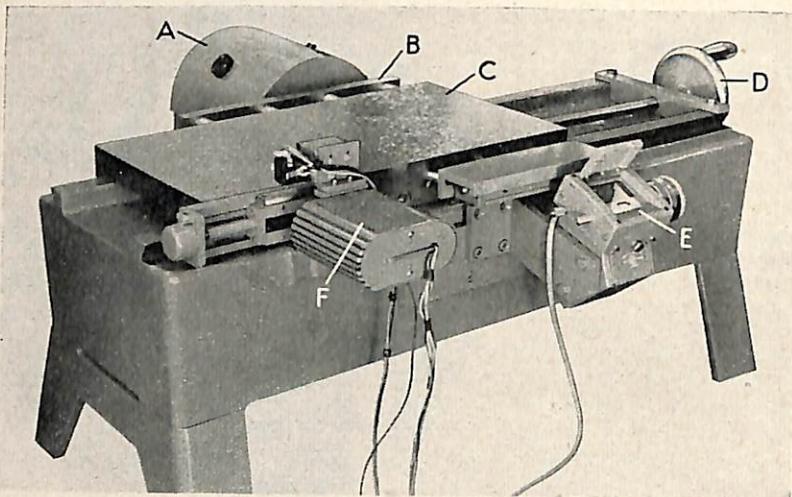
Machine Bed and Table arranged for Demonstrating the Application of the Digitiser, and the Photo-electric Microscope for Precise Positioning Control. The Projector Unit at E is for Demonstration Purposes Only
